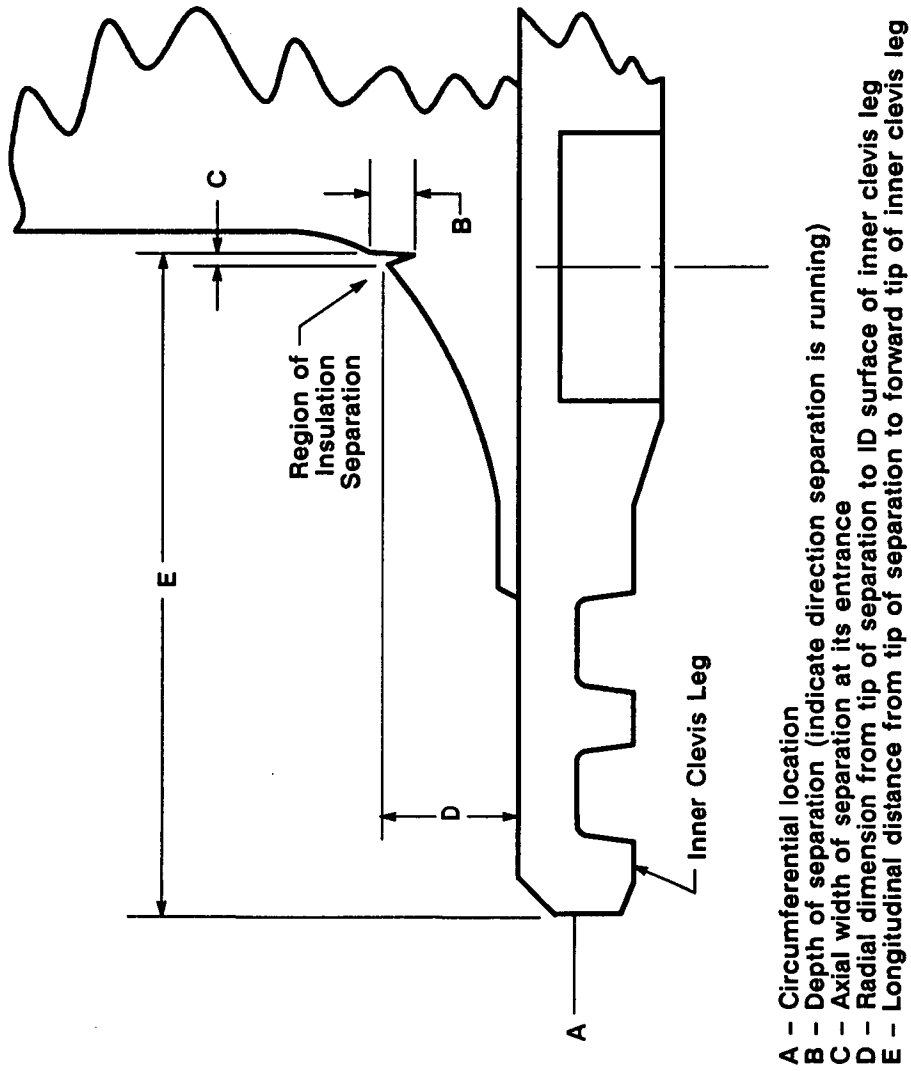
Test Joint Clevis Unbond Inspection Locations
